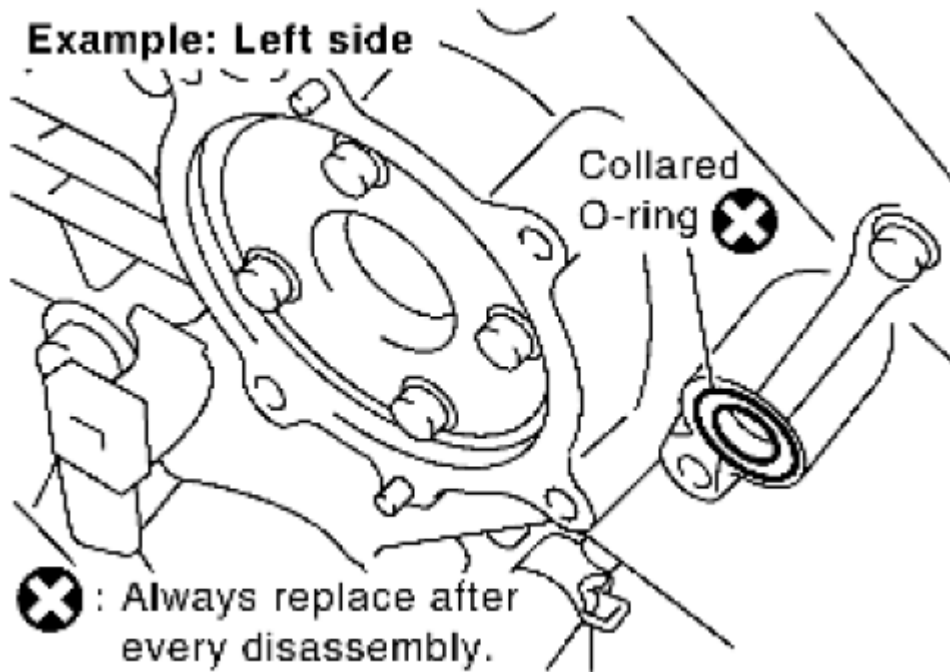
Identifying Intake Valve Timing Control Covers
